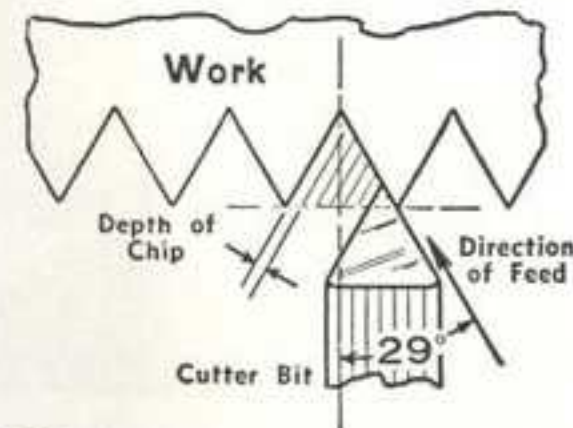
Action of Thread Cutting Tool when Compound Rest is Set at 29° Angle
